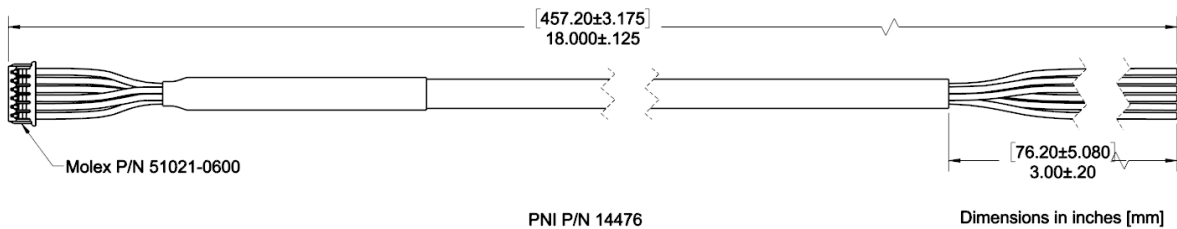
Molex-to-Pigtail Interface Cable Drawing, pn 14476
